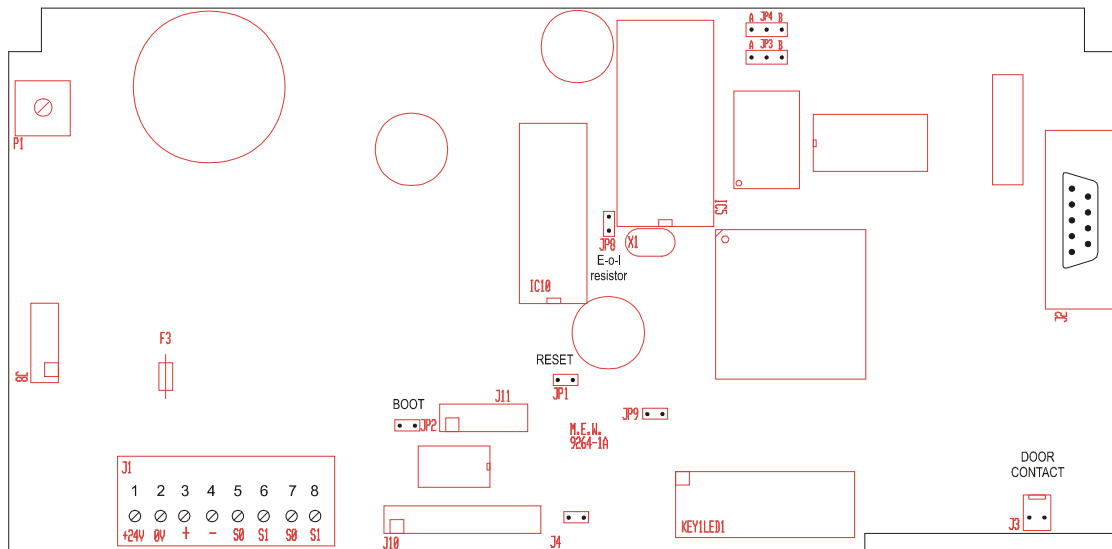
The ext. FBPs 1826 & 1828 main board p.c.b. Position of the terminal block "J1", the jumper "JP8", etc.
